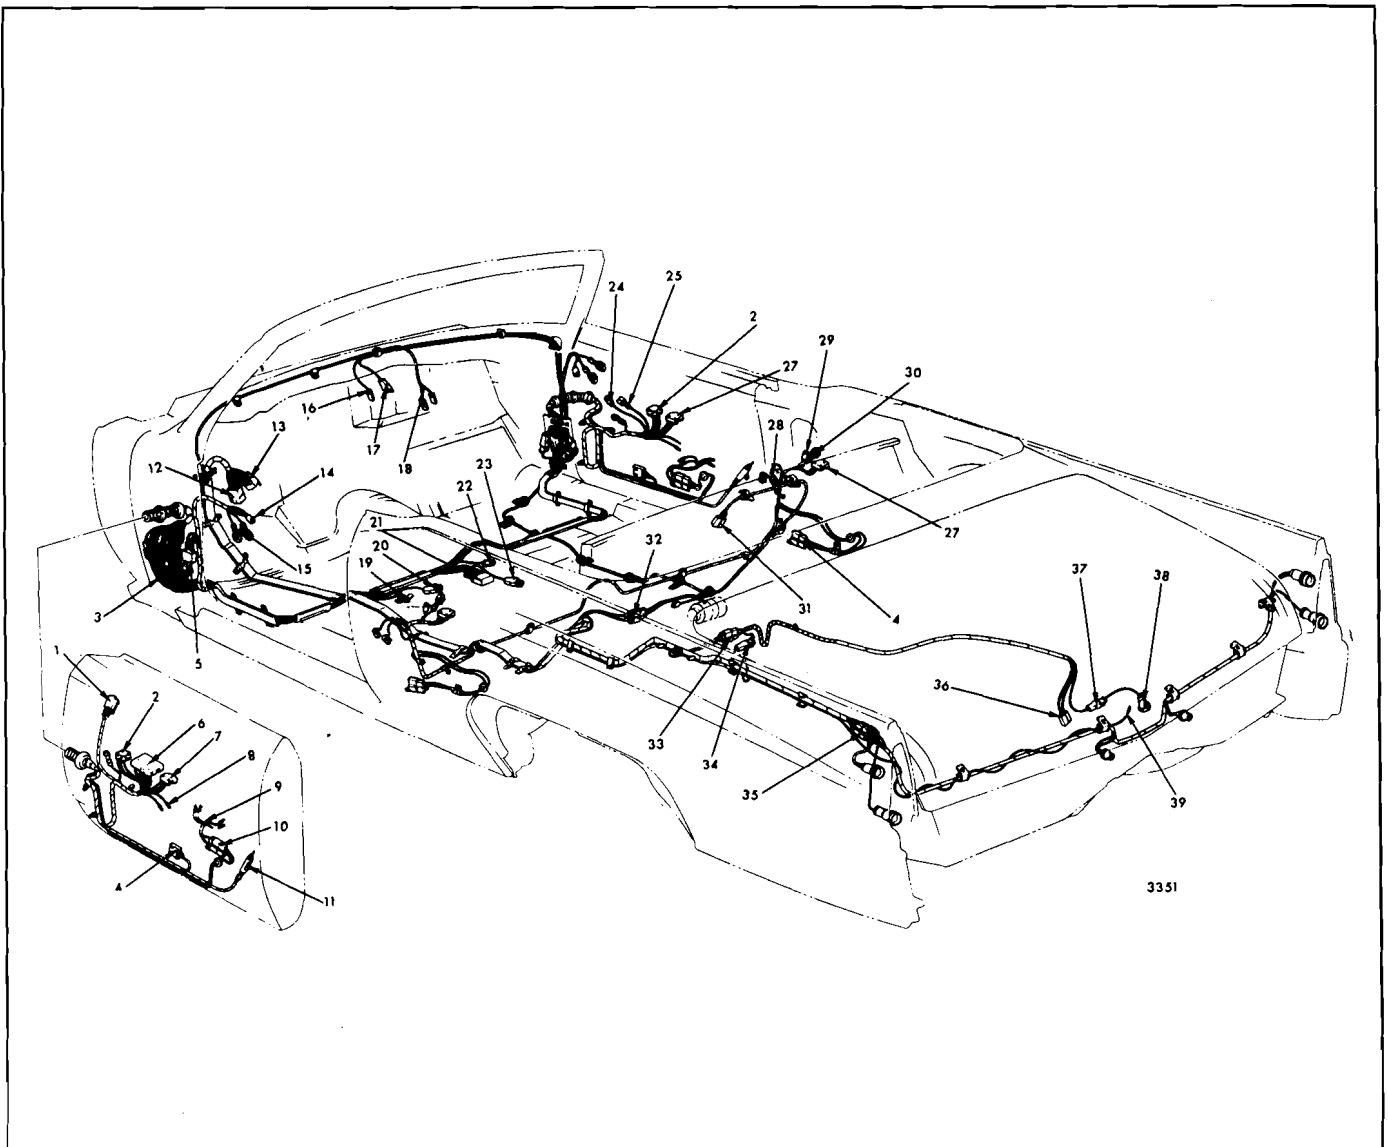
Cadillac "C-67" Styles - Body Wire Routing (Typical)
